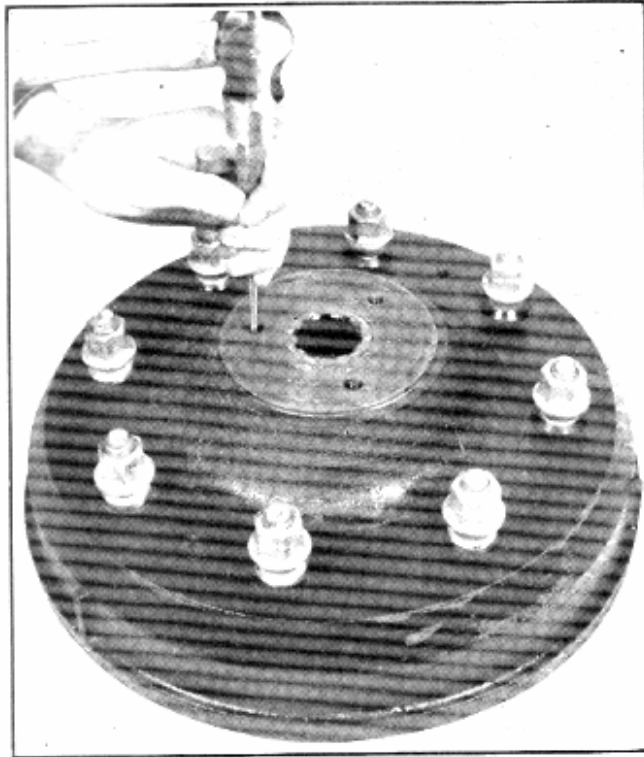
Removing Front Hub Outer Bearing Cone & Roller Assembly
